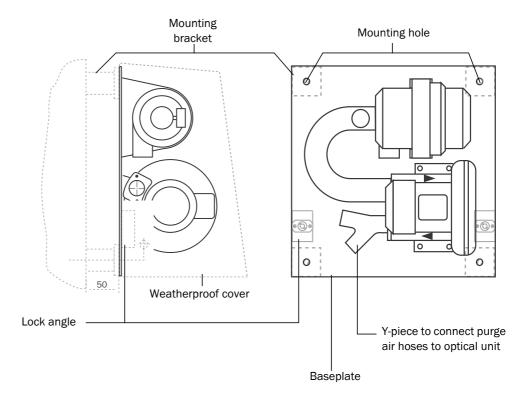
$\,$ Mounting the purge air unit SLV 4
